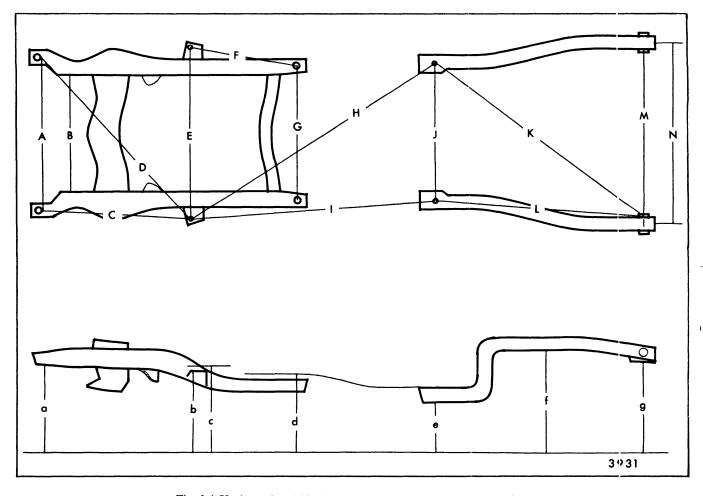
Horizontal and Vertical Checking Dimensions - "F" Bodies
